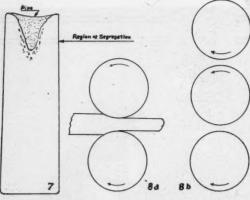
Sketch of section through an ingot. Fig. 8a—Showing how rolls reduce thickness of bar. Fig. 8b—Illustrating principle of "three high" mill.
